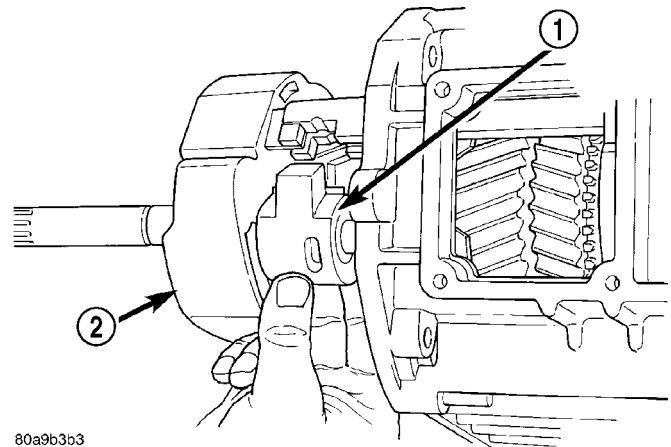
SHIFT SHAFT LEVER AND BUSHING
